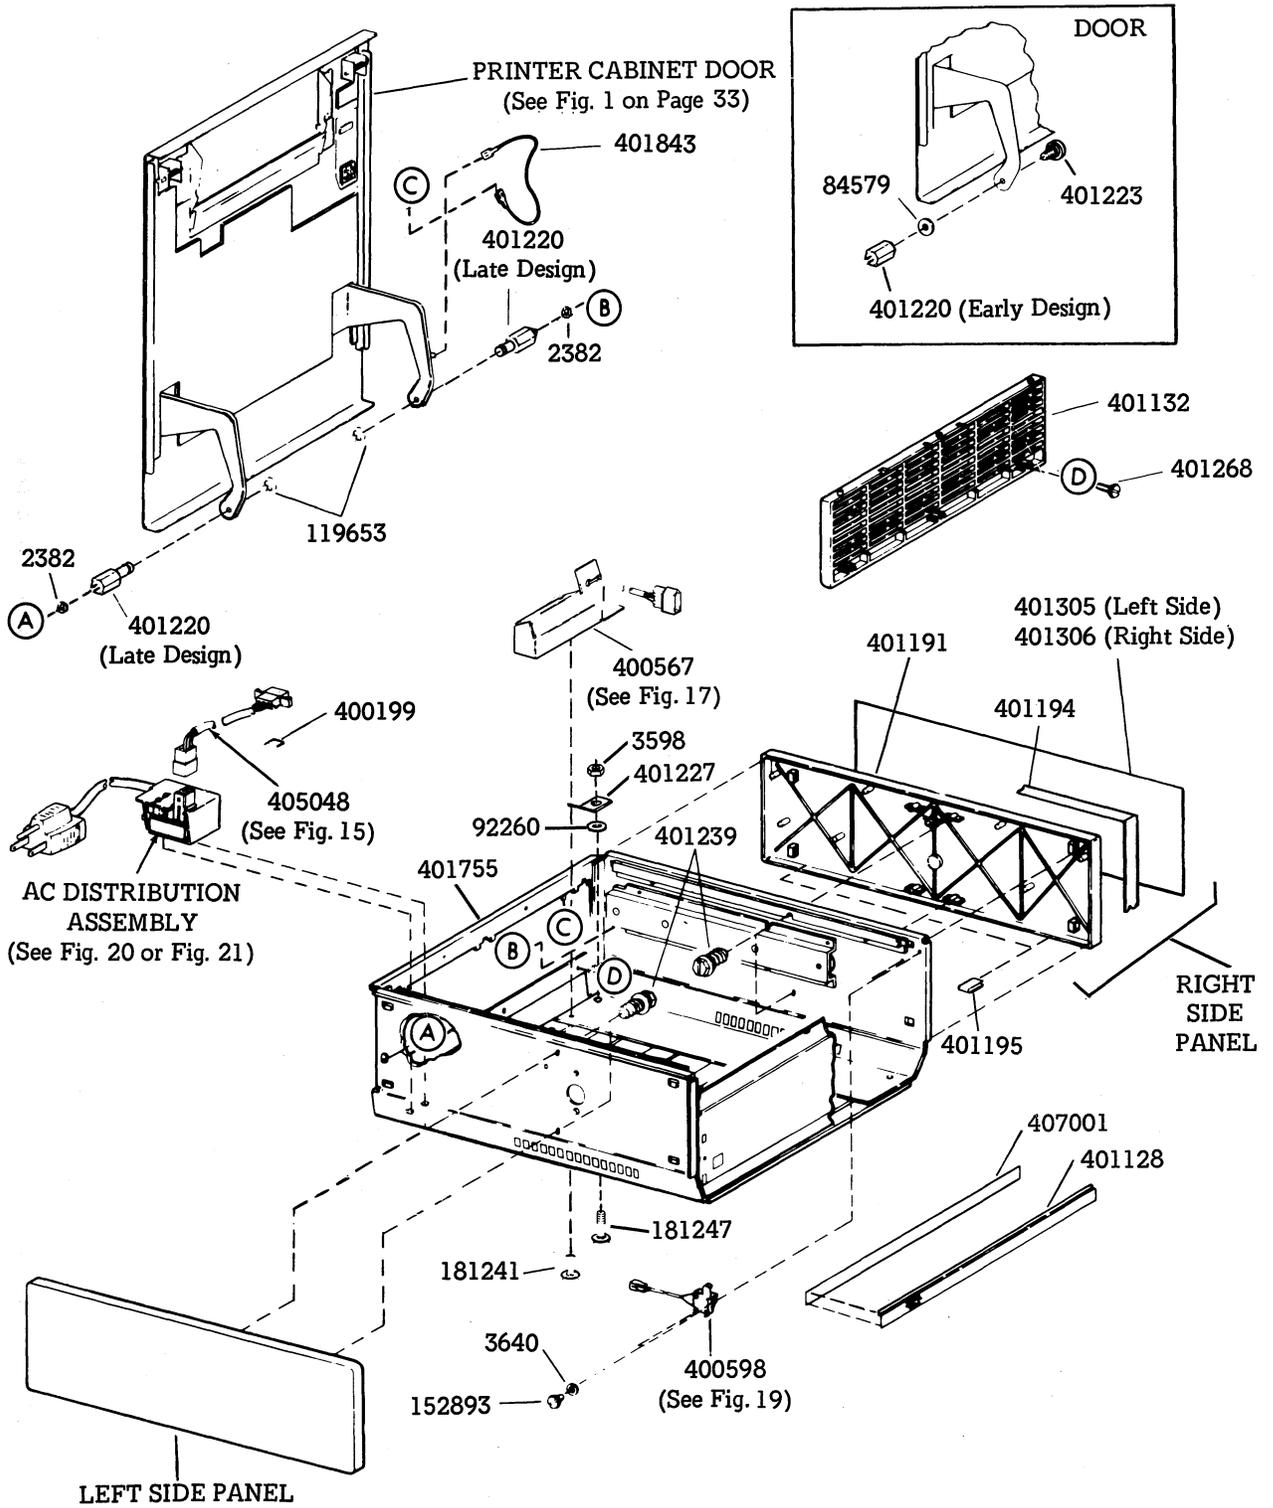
40CAB201/ZZ Printer Cabinet Core for Adjacent or RO Friction Feed Printer
